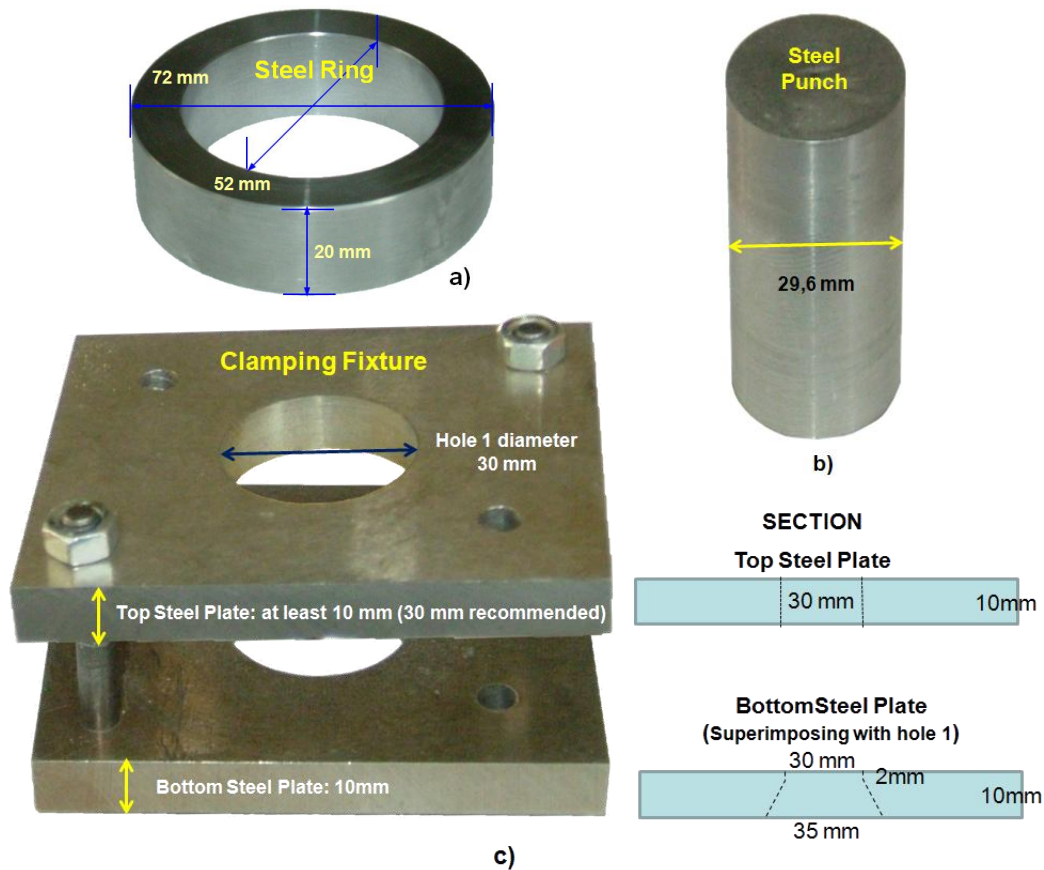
Material shear strength apparatus comprising: a) Steel ring, b) Steel punch, and c) Clamping fixture
